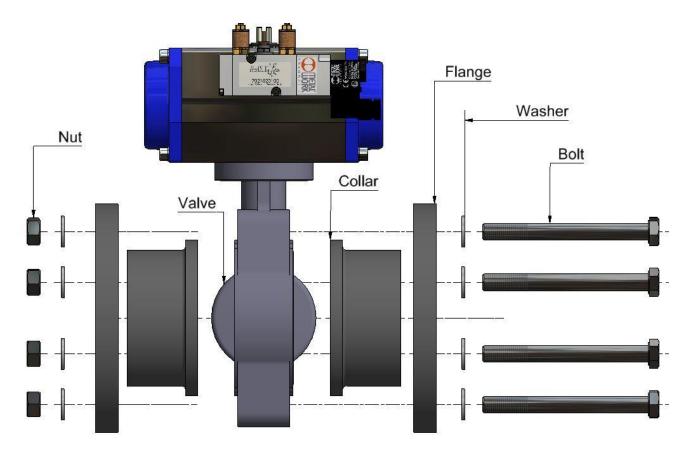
Sealing Envalve with glue size 75 – 200 mm
